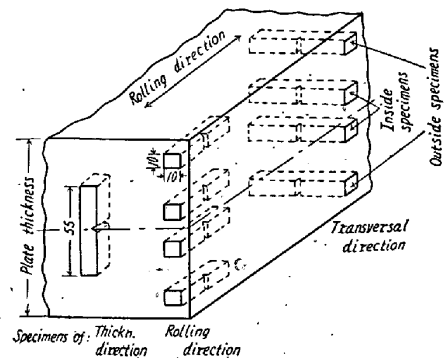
Sampling details of V-notch Charpy impact test specimens.
